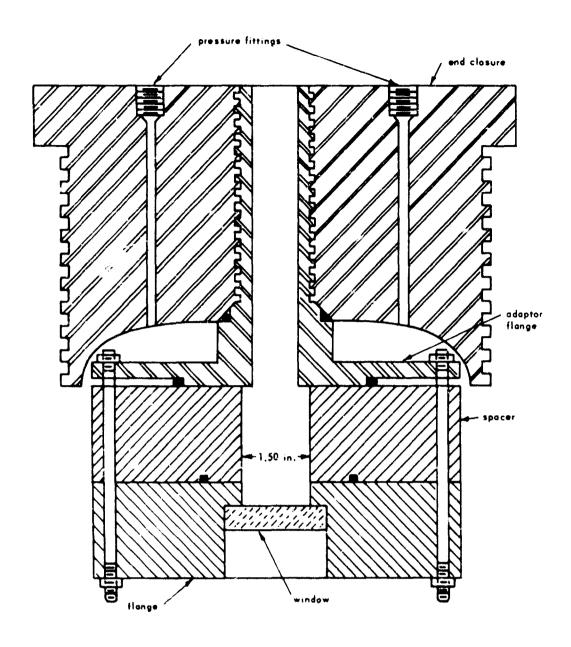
Schematic of a typical window and flange test assembly secured to the end closure of a Mk I 9-inch pressure vessel.
